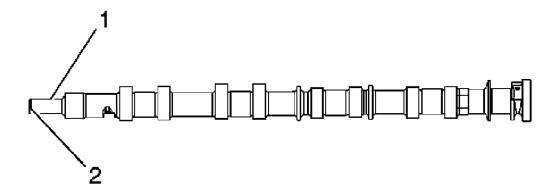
Identifying Sealing Surface & Threads Courtesy of GENERAL MOTORS CORP.
